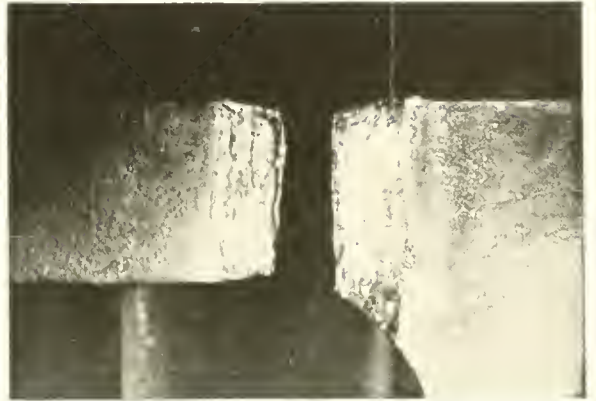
, BEFORE. Broken Engine Frame with break cut out, prepared for welding.
